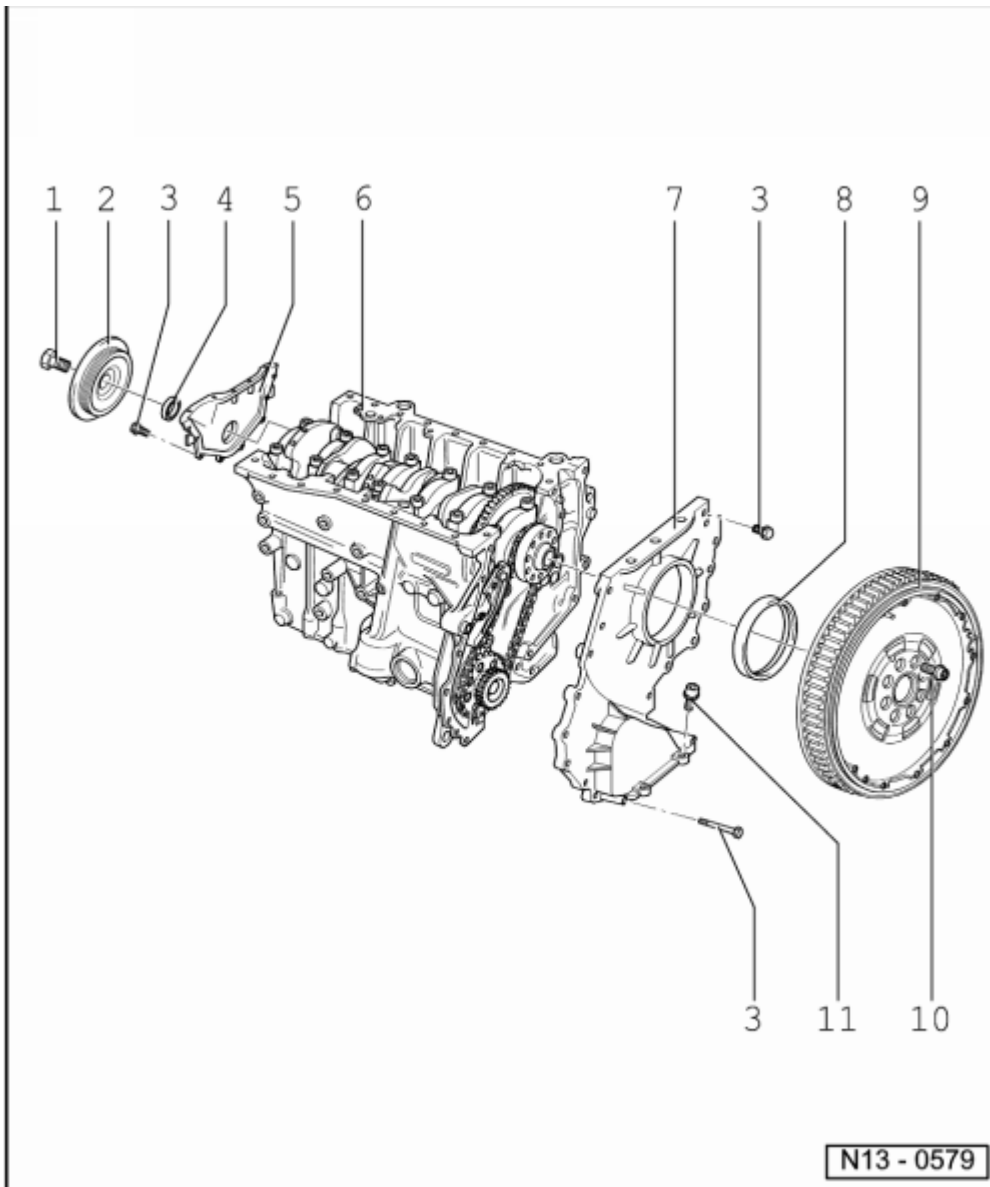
Exploded View Of Sealing Flanges And Dual-Mass Flywheel
